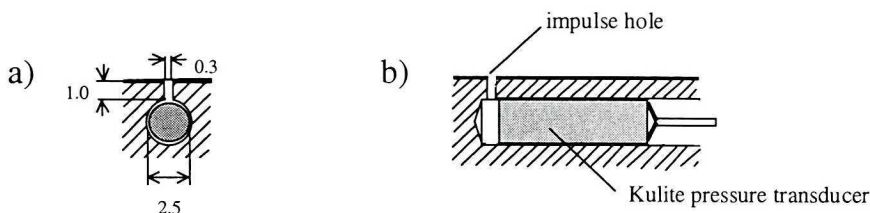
Details of the Kulite pressure transducer installation: a) front view, b) main view
